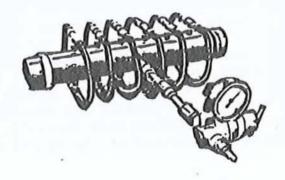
Test Fixture for Fuel Return Tubes and Hoses.
